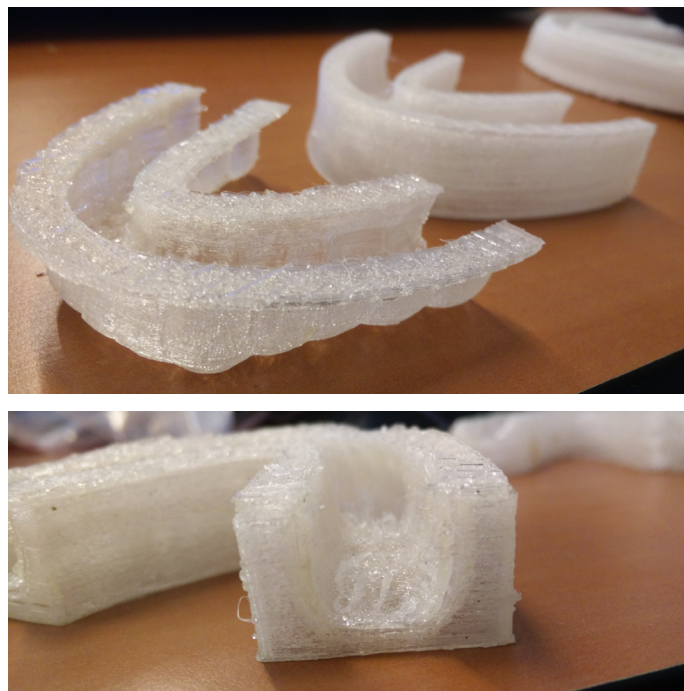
A snug-fitting TPU sheet and frame adhered using DMF solvent welding.
